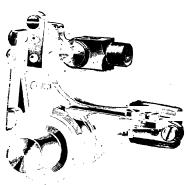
External Wipe Contact Breaker for Two-cylinder Motor.
